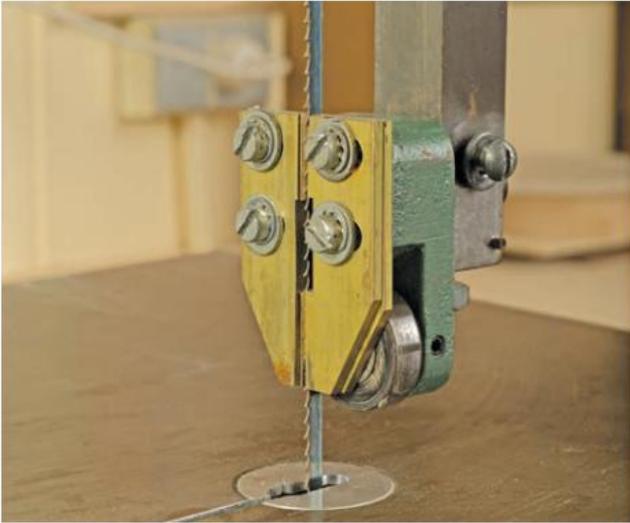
Close-up of blade guide and ball bearing. Note: guard removed for photographic purposes only
